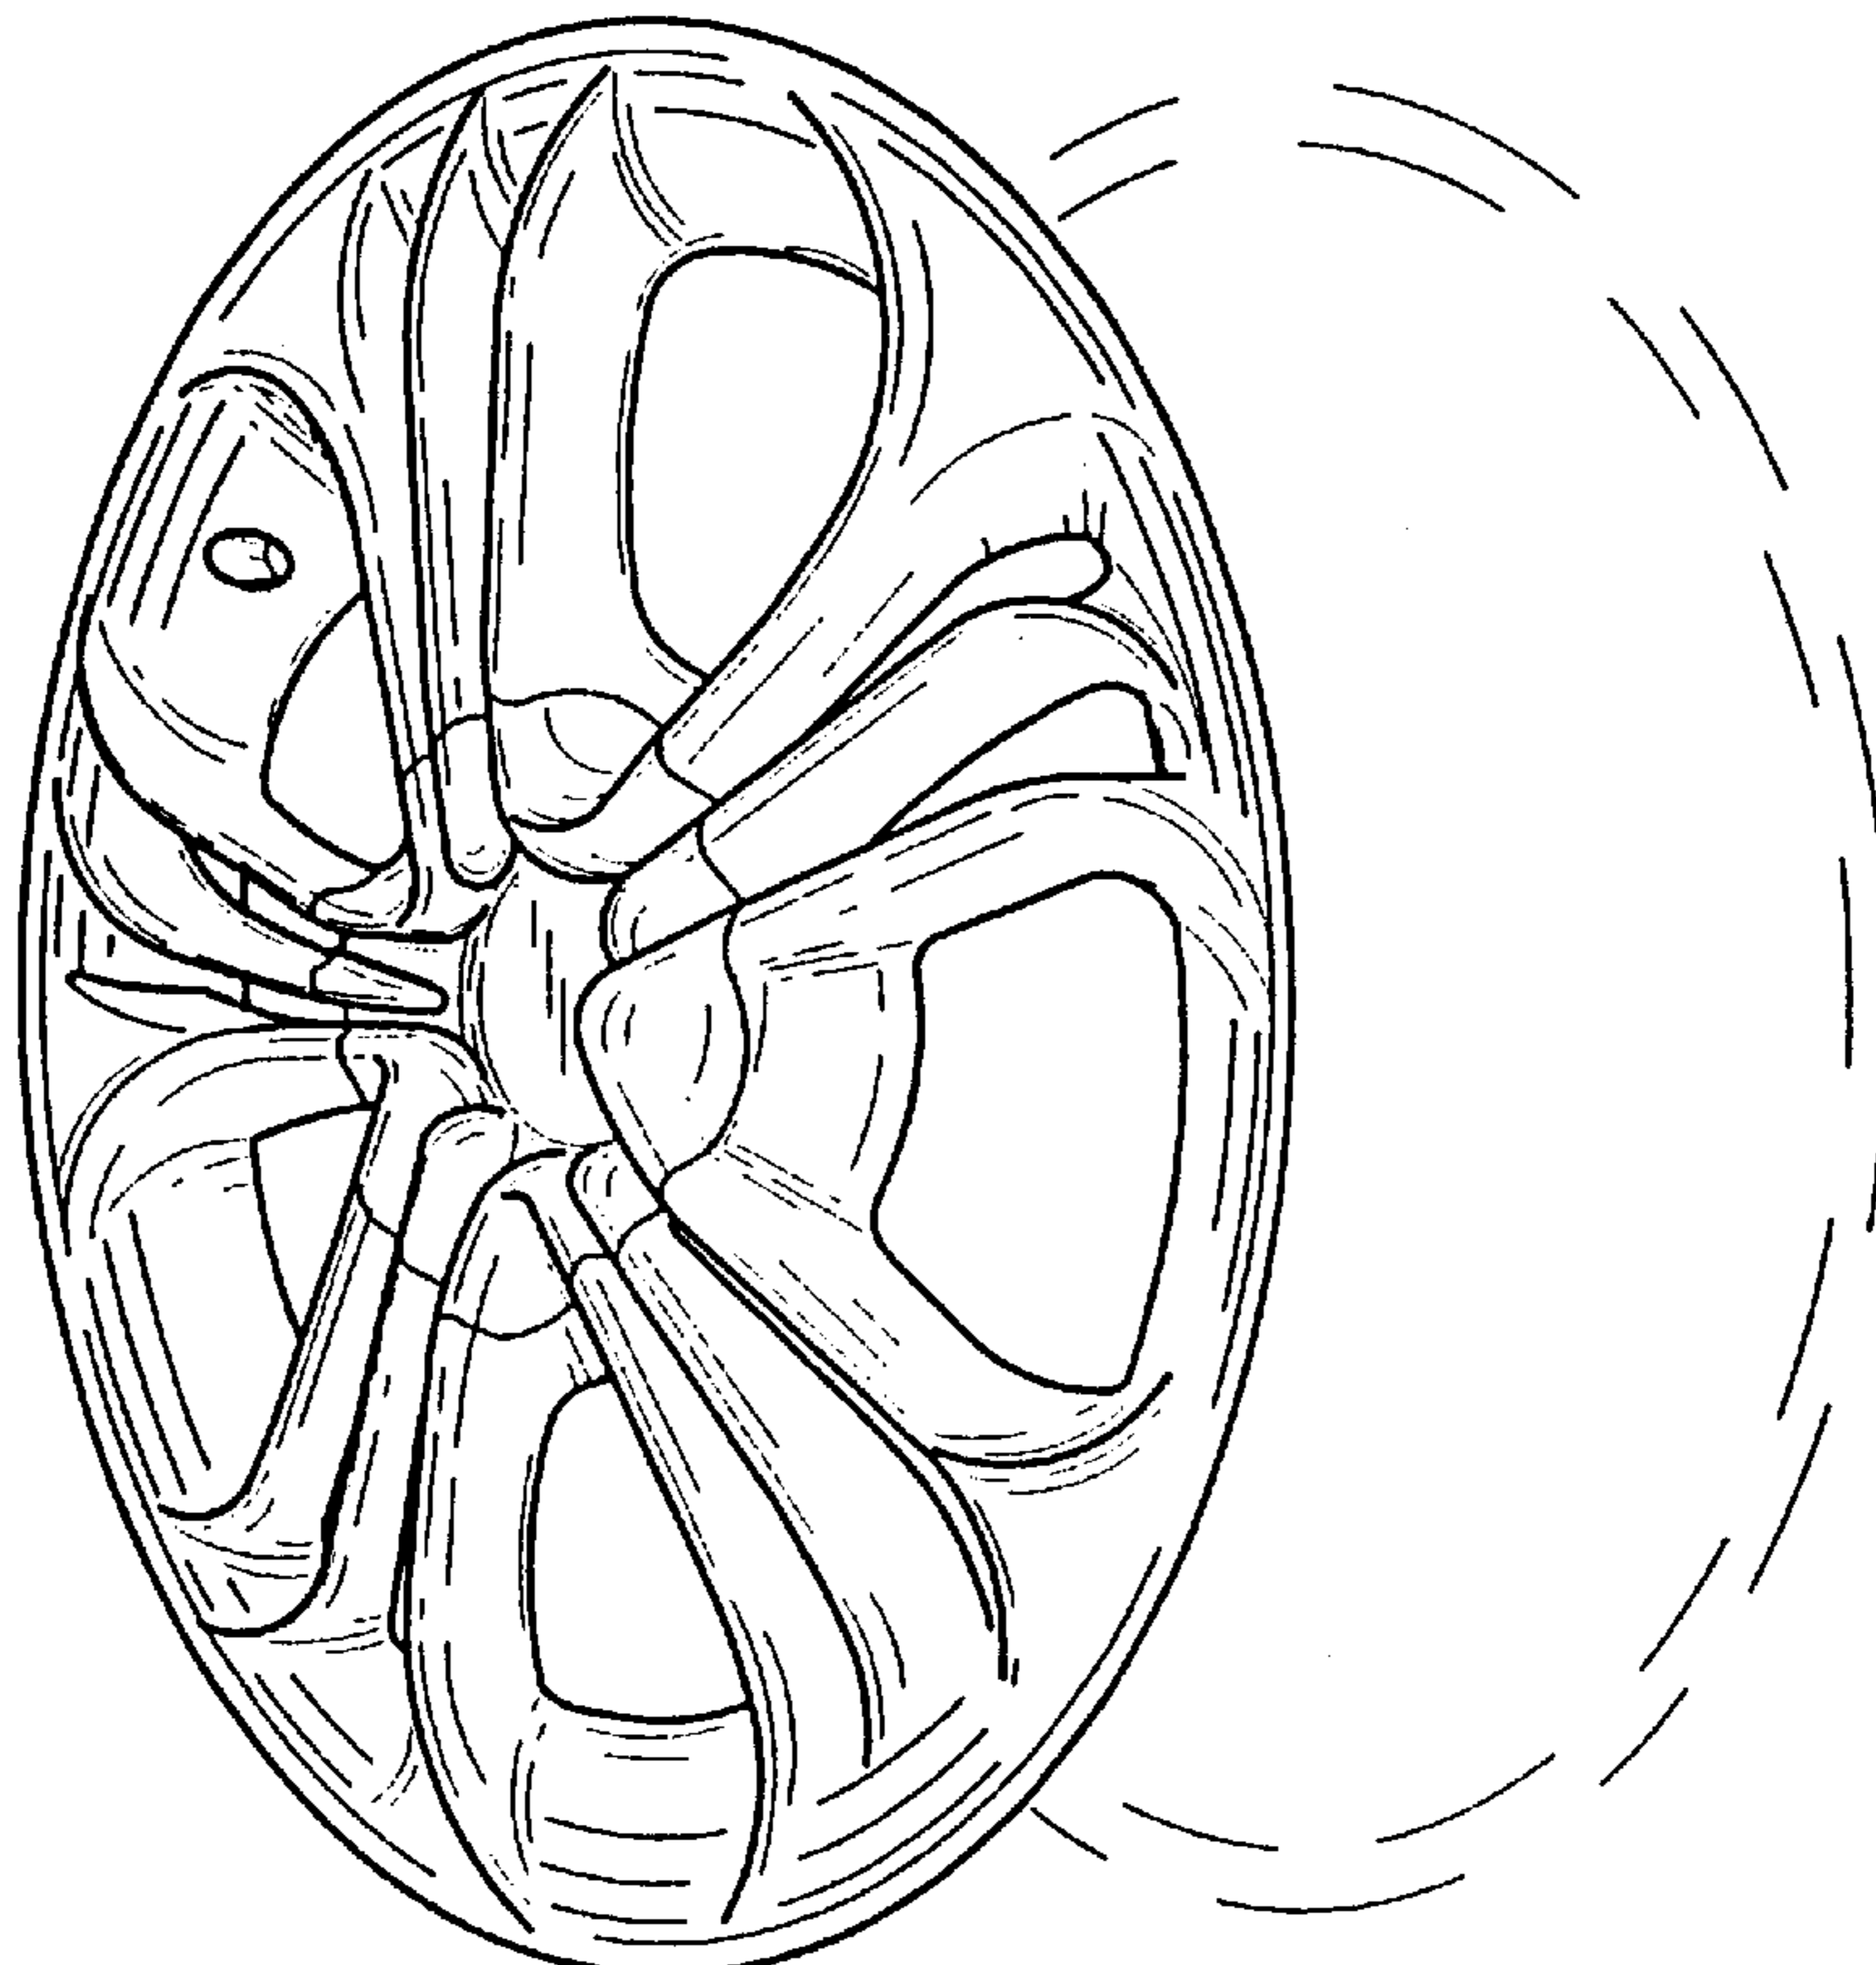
is a front perspective view of a wheel showing the first embodiment of my new design;
